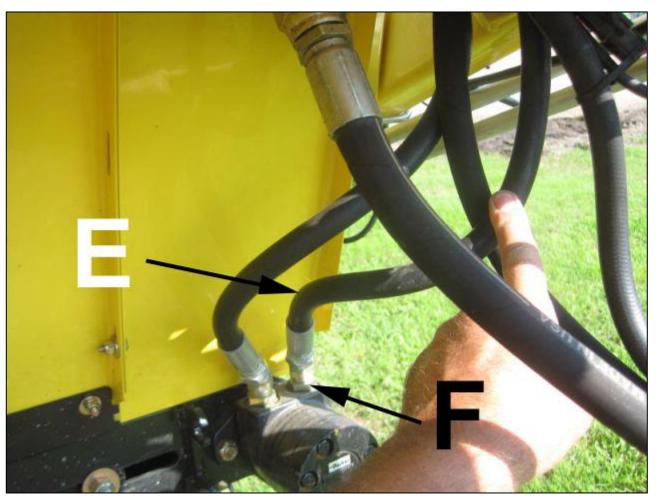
RIGHT HAND HONEY BEE CANVAS MOTOR PORTS
